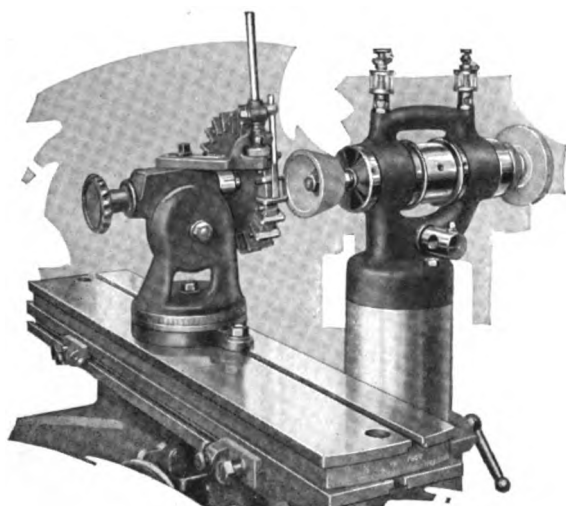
Grinding the Side of Inserted Tooth Cutter
